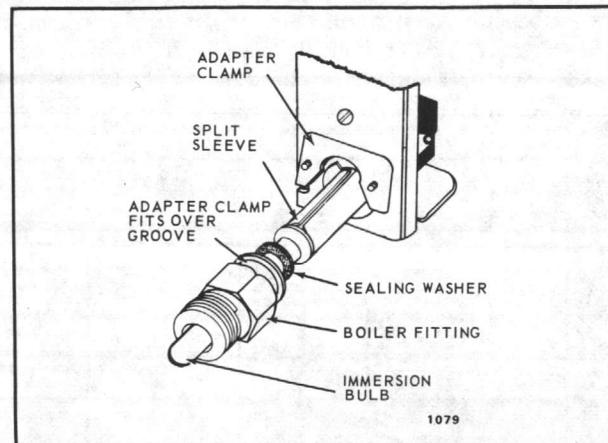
DIRECT IMMERSION MODEL WITH BULB COMPRESSION FITTING PARTIALLY REMOVED.
